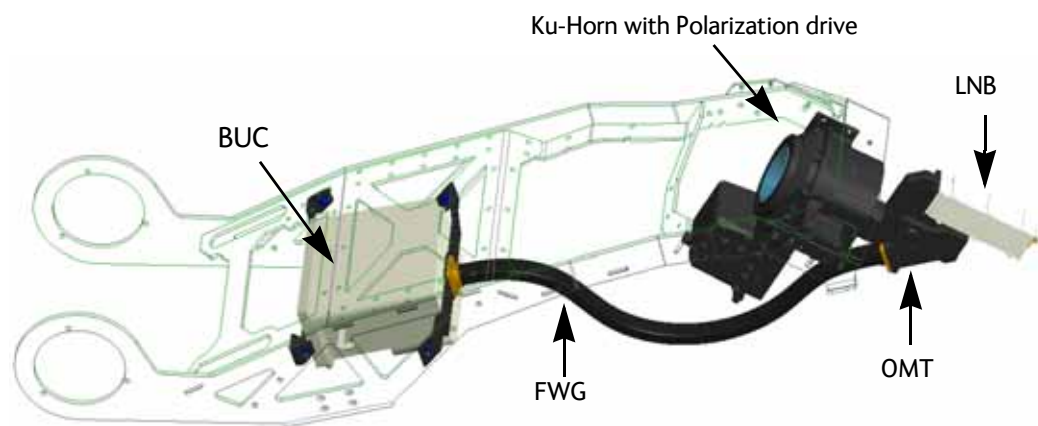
Components of the EXPLORER 8100 Ku-Band RF assembly
